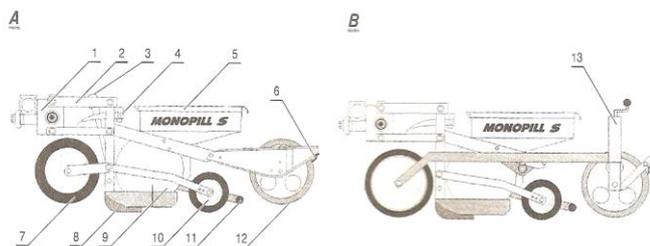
The sowing unit of Monopill S seeder: A - with front depth wheel, 1 - mounting the seeding unit on the frame, 2 - parallelogram, 3 - sowing depth adjustment, 4 - lifting device, 5 - hopper, 6 - squeegee, 7 - front wheel, 8 - heel, 9 - sowing device, 10 - middle push wheel, 11 - wrapper, 12 - rear push wheel; B - with tandem wheel arrangement, 13 - sowing depth adjustment
